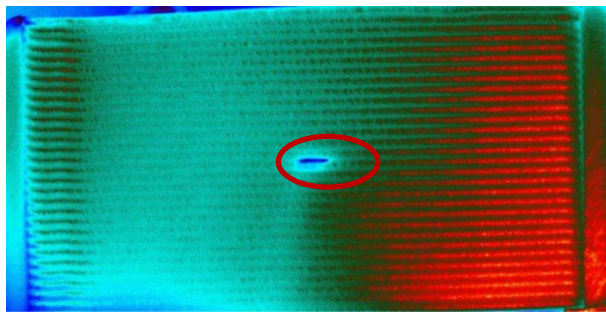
IR image of 3D printed sample 3 with the nozzle located 20 mm below the defect and the shop air flow on (defect circled in red)
